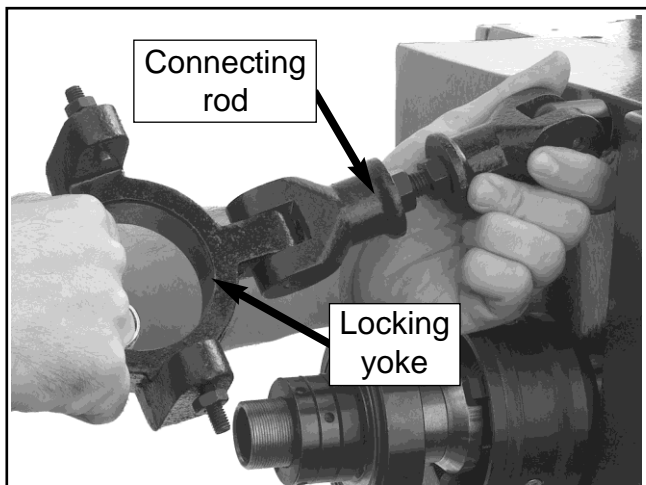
Connecting rod and locking yoke installed on pivot connector.
